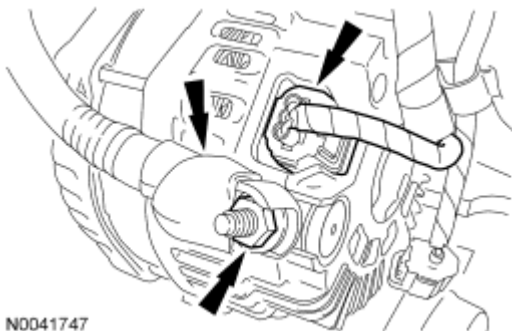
Locating Generator B+ Cable, Electrical Connector And Nut
